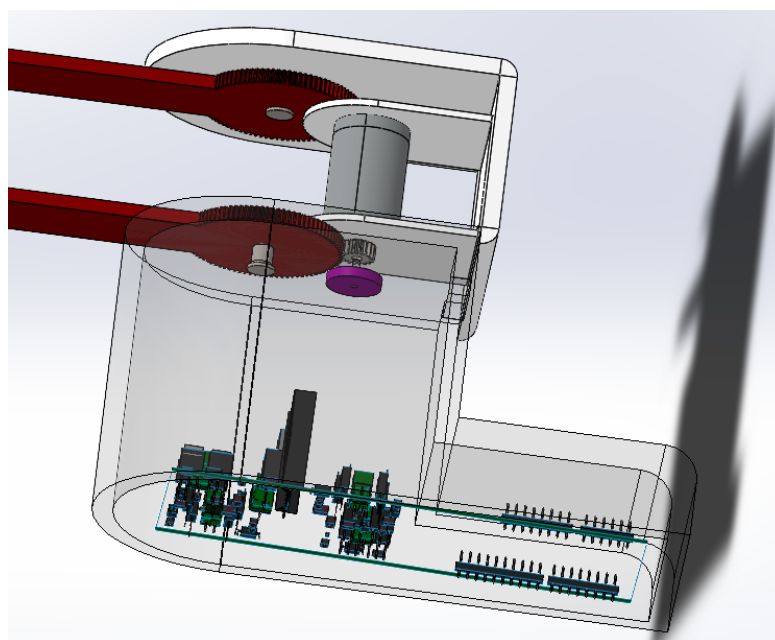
CAD Model of the Base Enclosure and Housing for PCB
